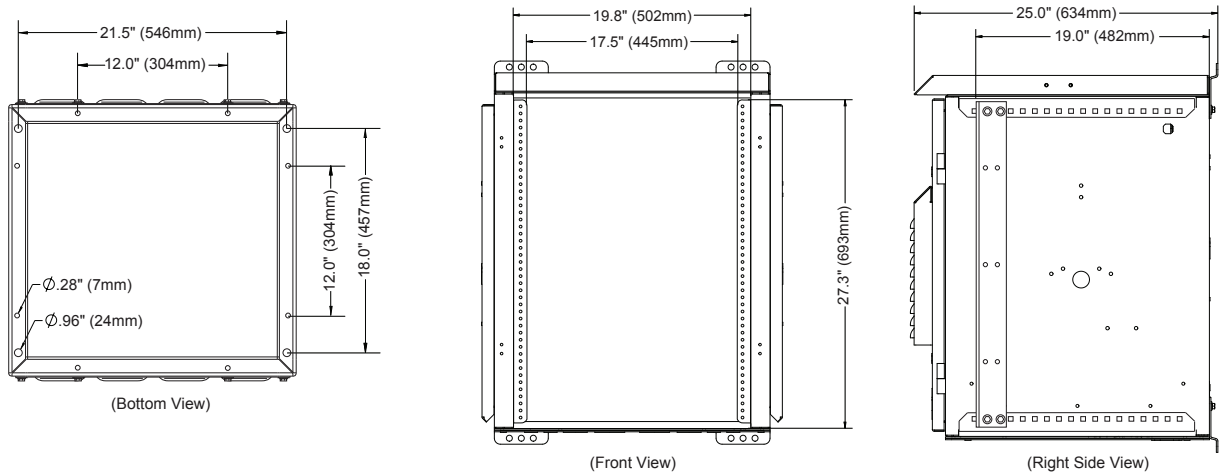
, FBE2322-ENC Footprint and Interior Cabinet Dimensions
